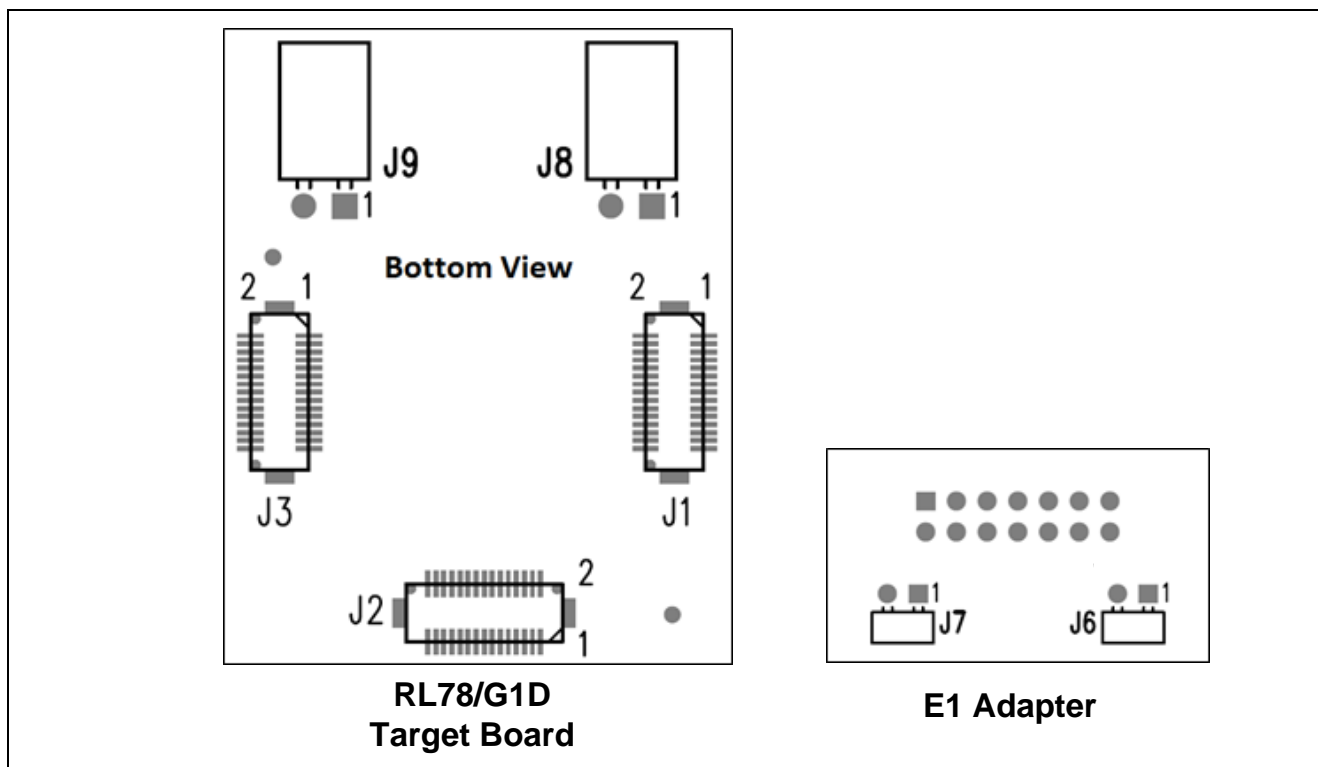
Connector pin assignment for RL78/G1D-SK Target Board
